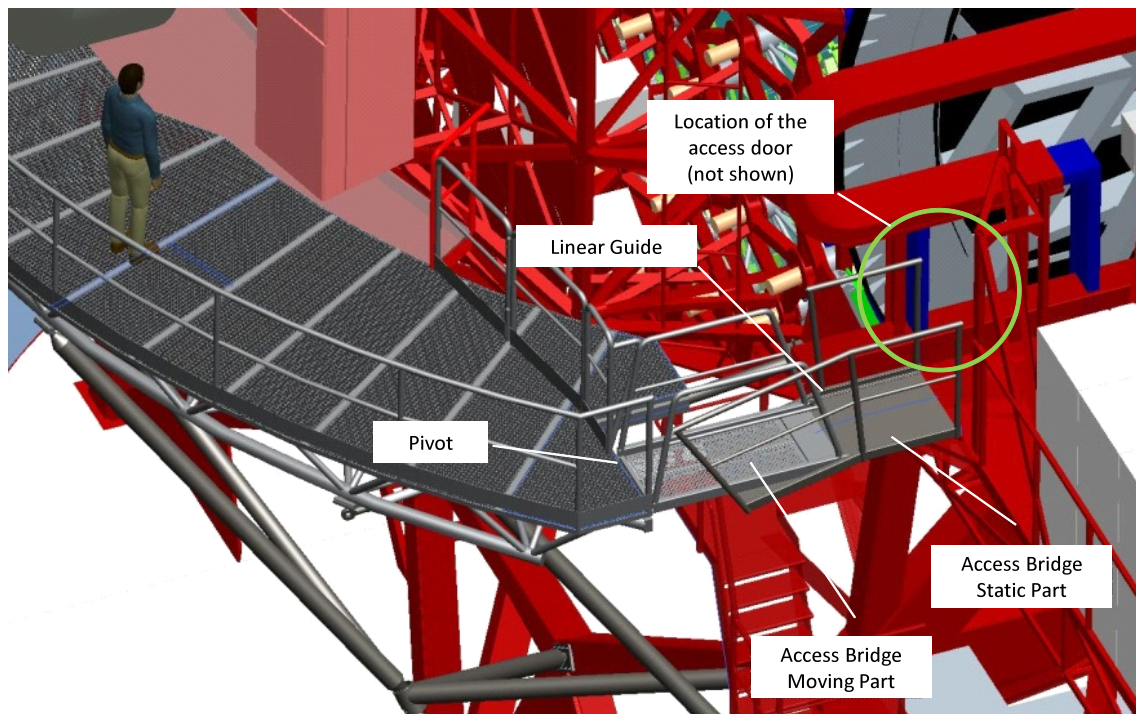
Access bridge connecting Nasmyth platforms with the Half Moon platform.
